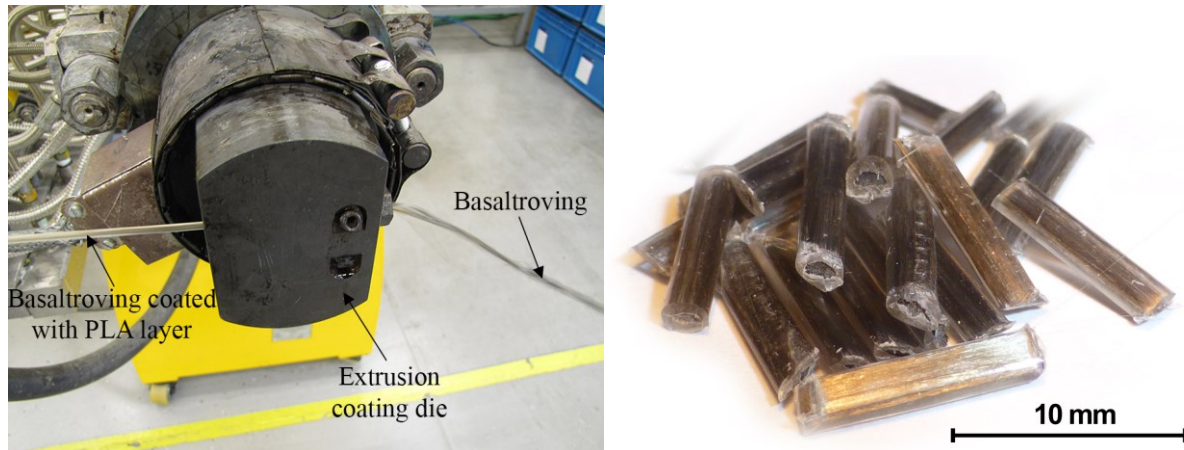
The extrusion coating of basalt roving with PLA by using the coating die (left) and the coated basalt roving chopped for injection moulding (right)
